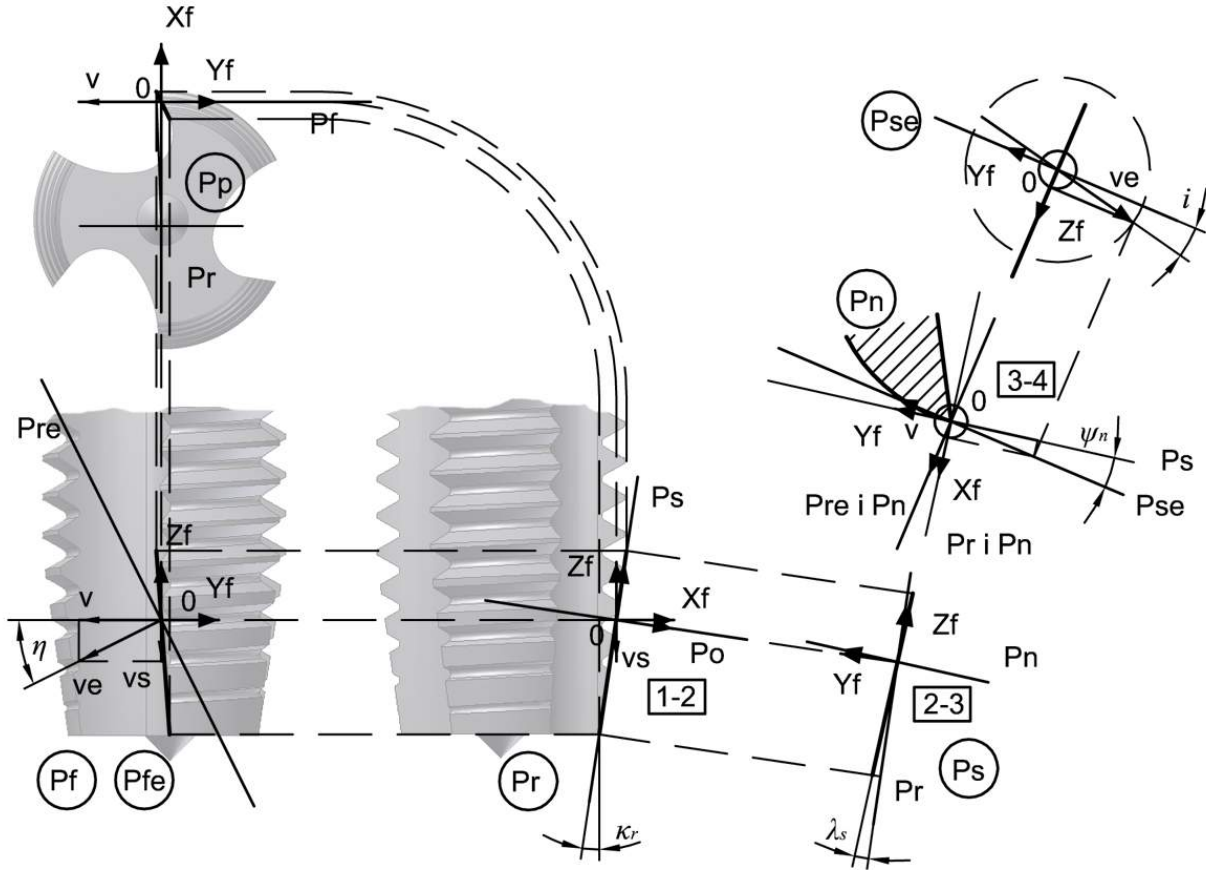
Tool-in-hand and the tool-in-use geometry of machine tap.
